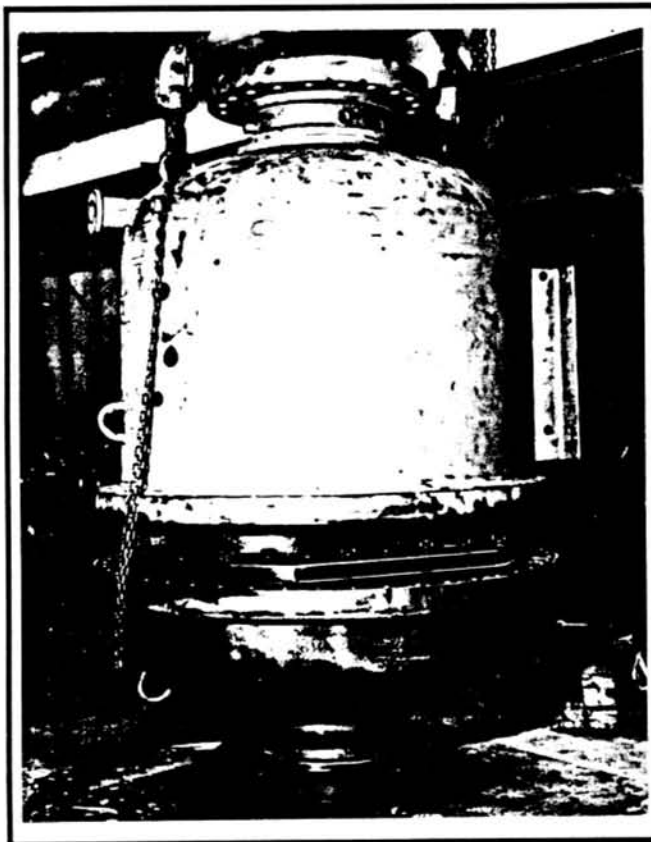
Position the meter body. Rotate the coupling tube on the pinion shaft assembly until the drive pin is positioned the same as the slat on the coupling jaw on the gear box
